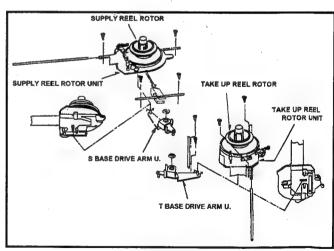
Install of S & T Reel Rotor Unit
